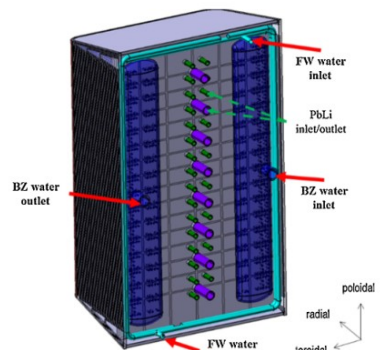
CAD of the rear side of the WCLL OB4 BM, showing the coolant I/O manifolds.
